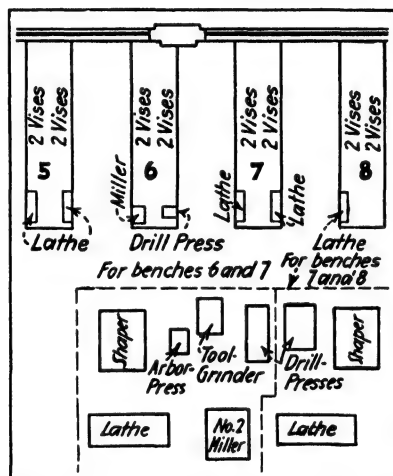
This detail from the floor plan shown in Fig. 105 shows each squad's working area.
